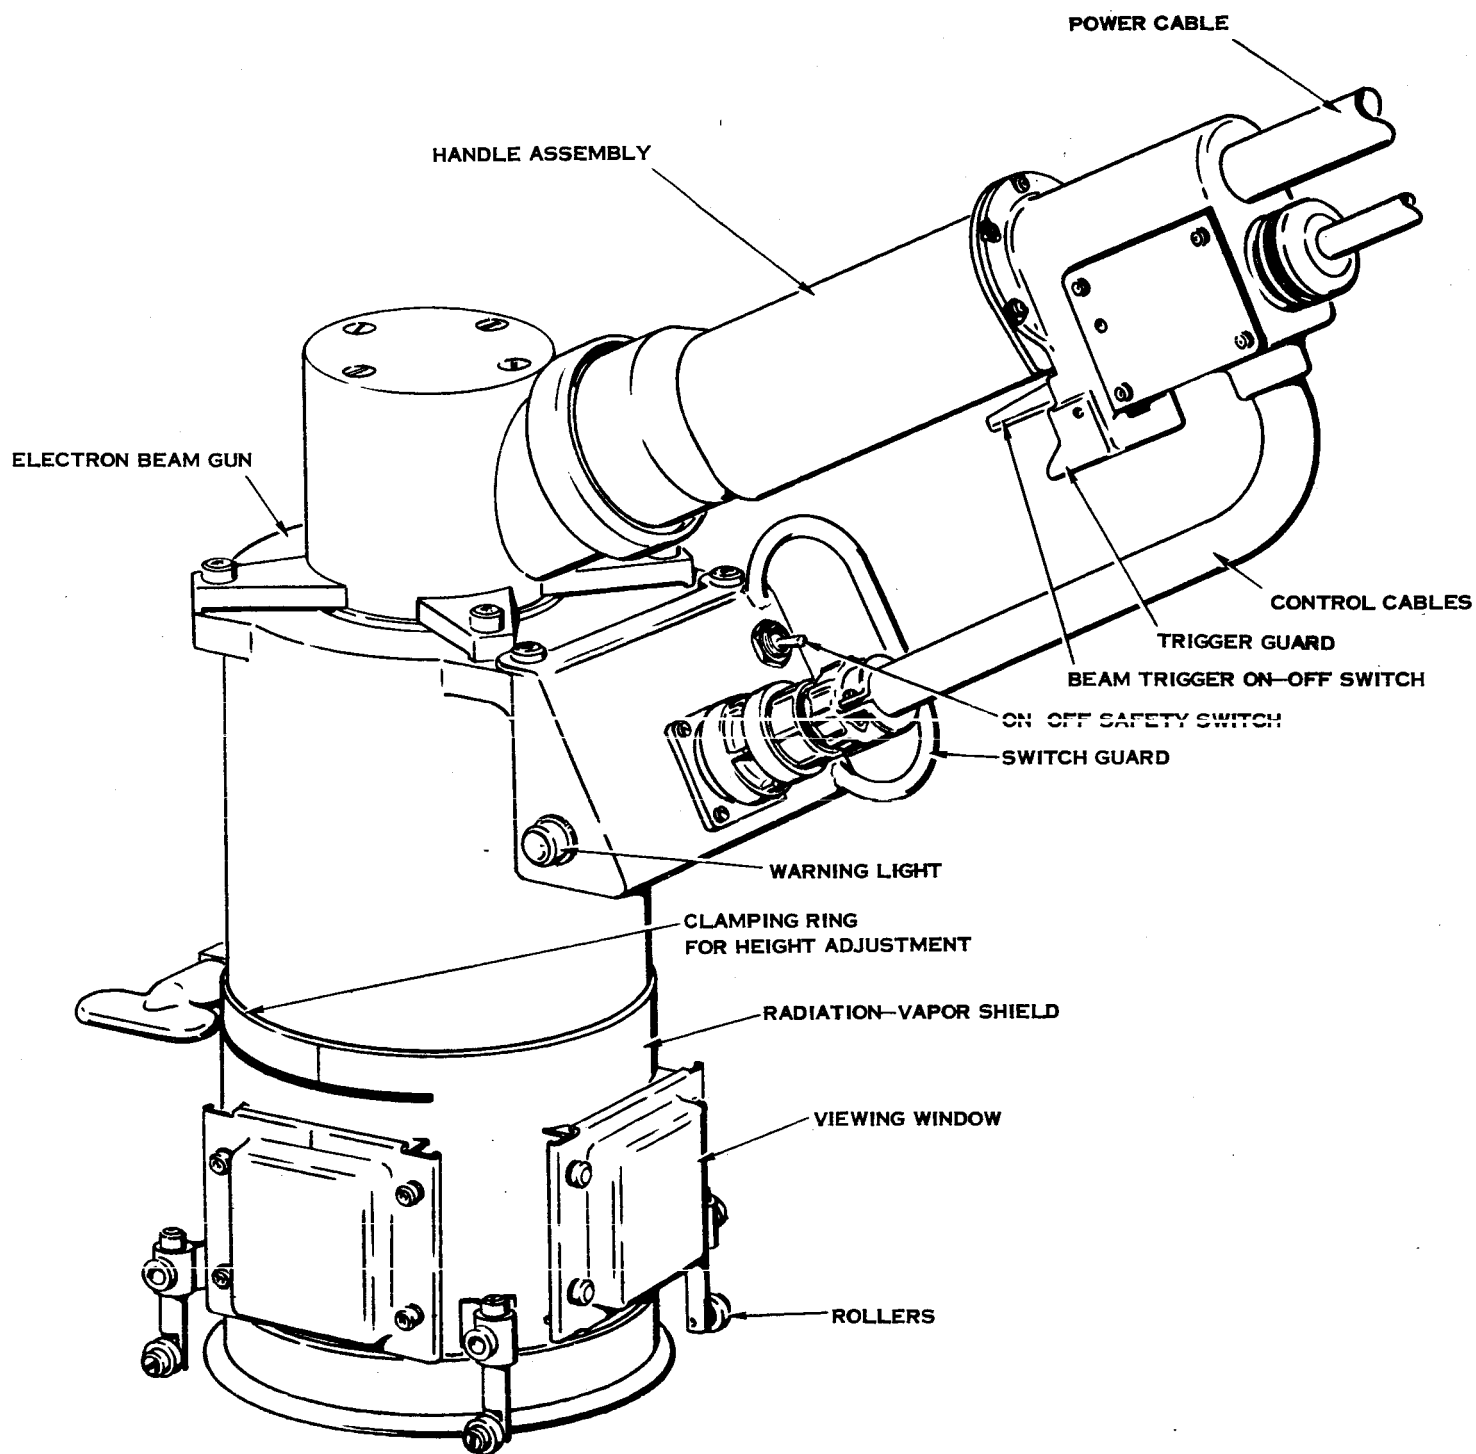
PROTOTYPE HAND-HELD ELECTRON BEAM GUN
